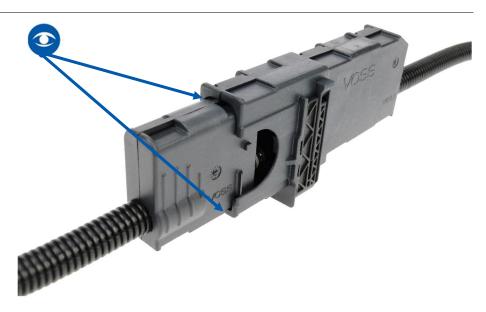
Poka Yoke design of QC system 301 EFSP2
